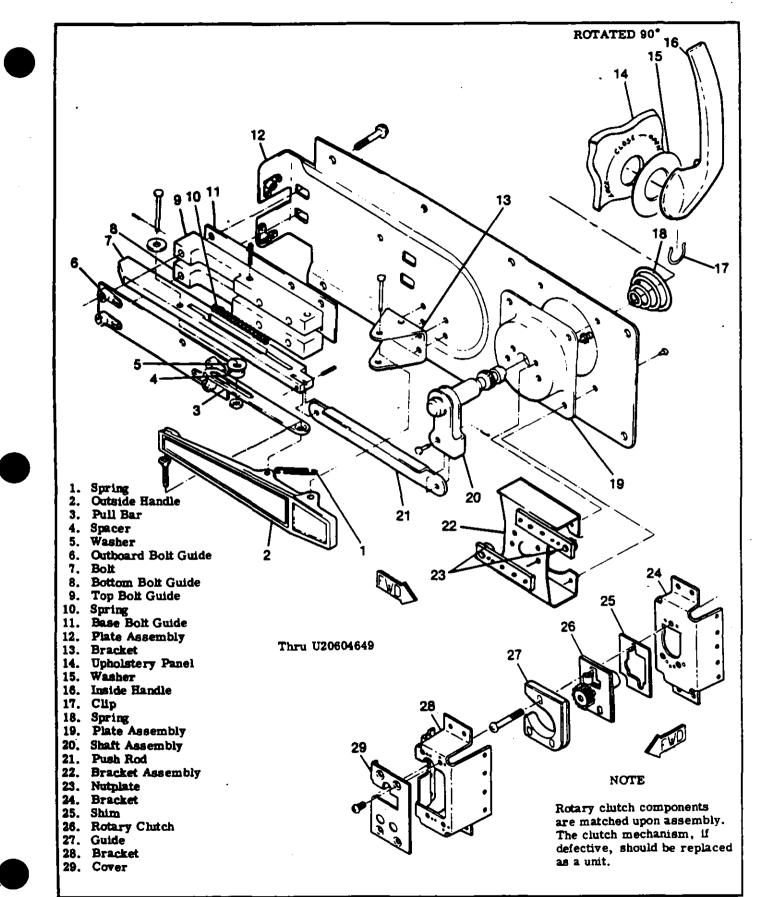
Cargo Door Latch Installation (Sheet 1 of 2)
